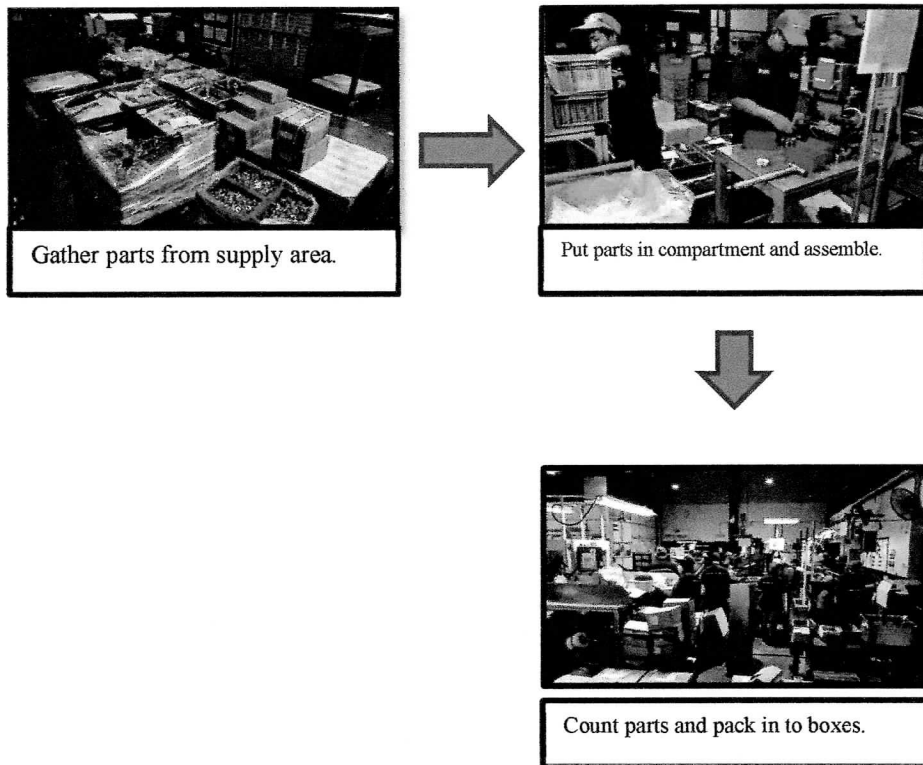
Process flow of TS/90 piston damping assembly line.
